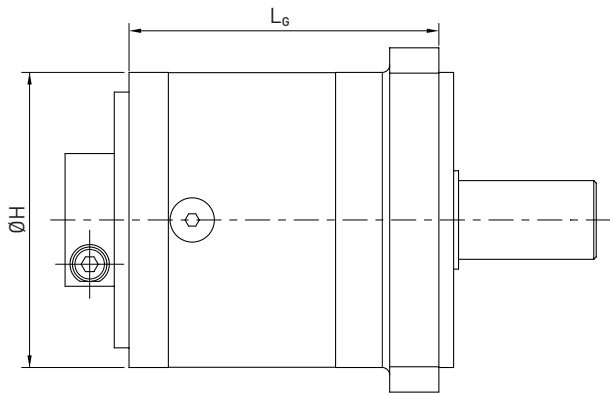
Gearbox dimensioned drawing for linear modules HM-B, linear tables HT-B, cantilever axes HC and double axes HD
